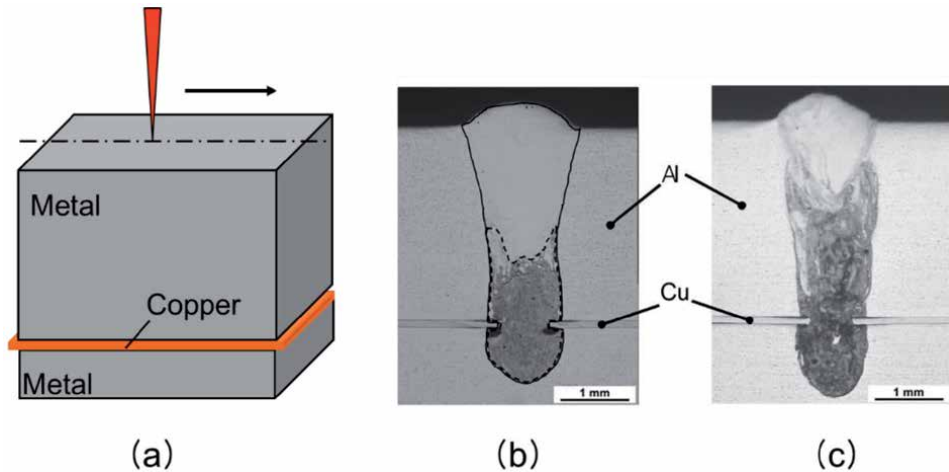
(a) Scheme of sandwich structure with a thin copper sheet between two aluminum sheets; weld cross section with (b) 0 mT and (c) 60 mT of alternating magnetic field [18].
